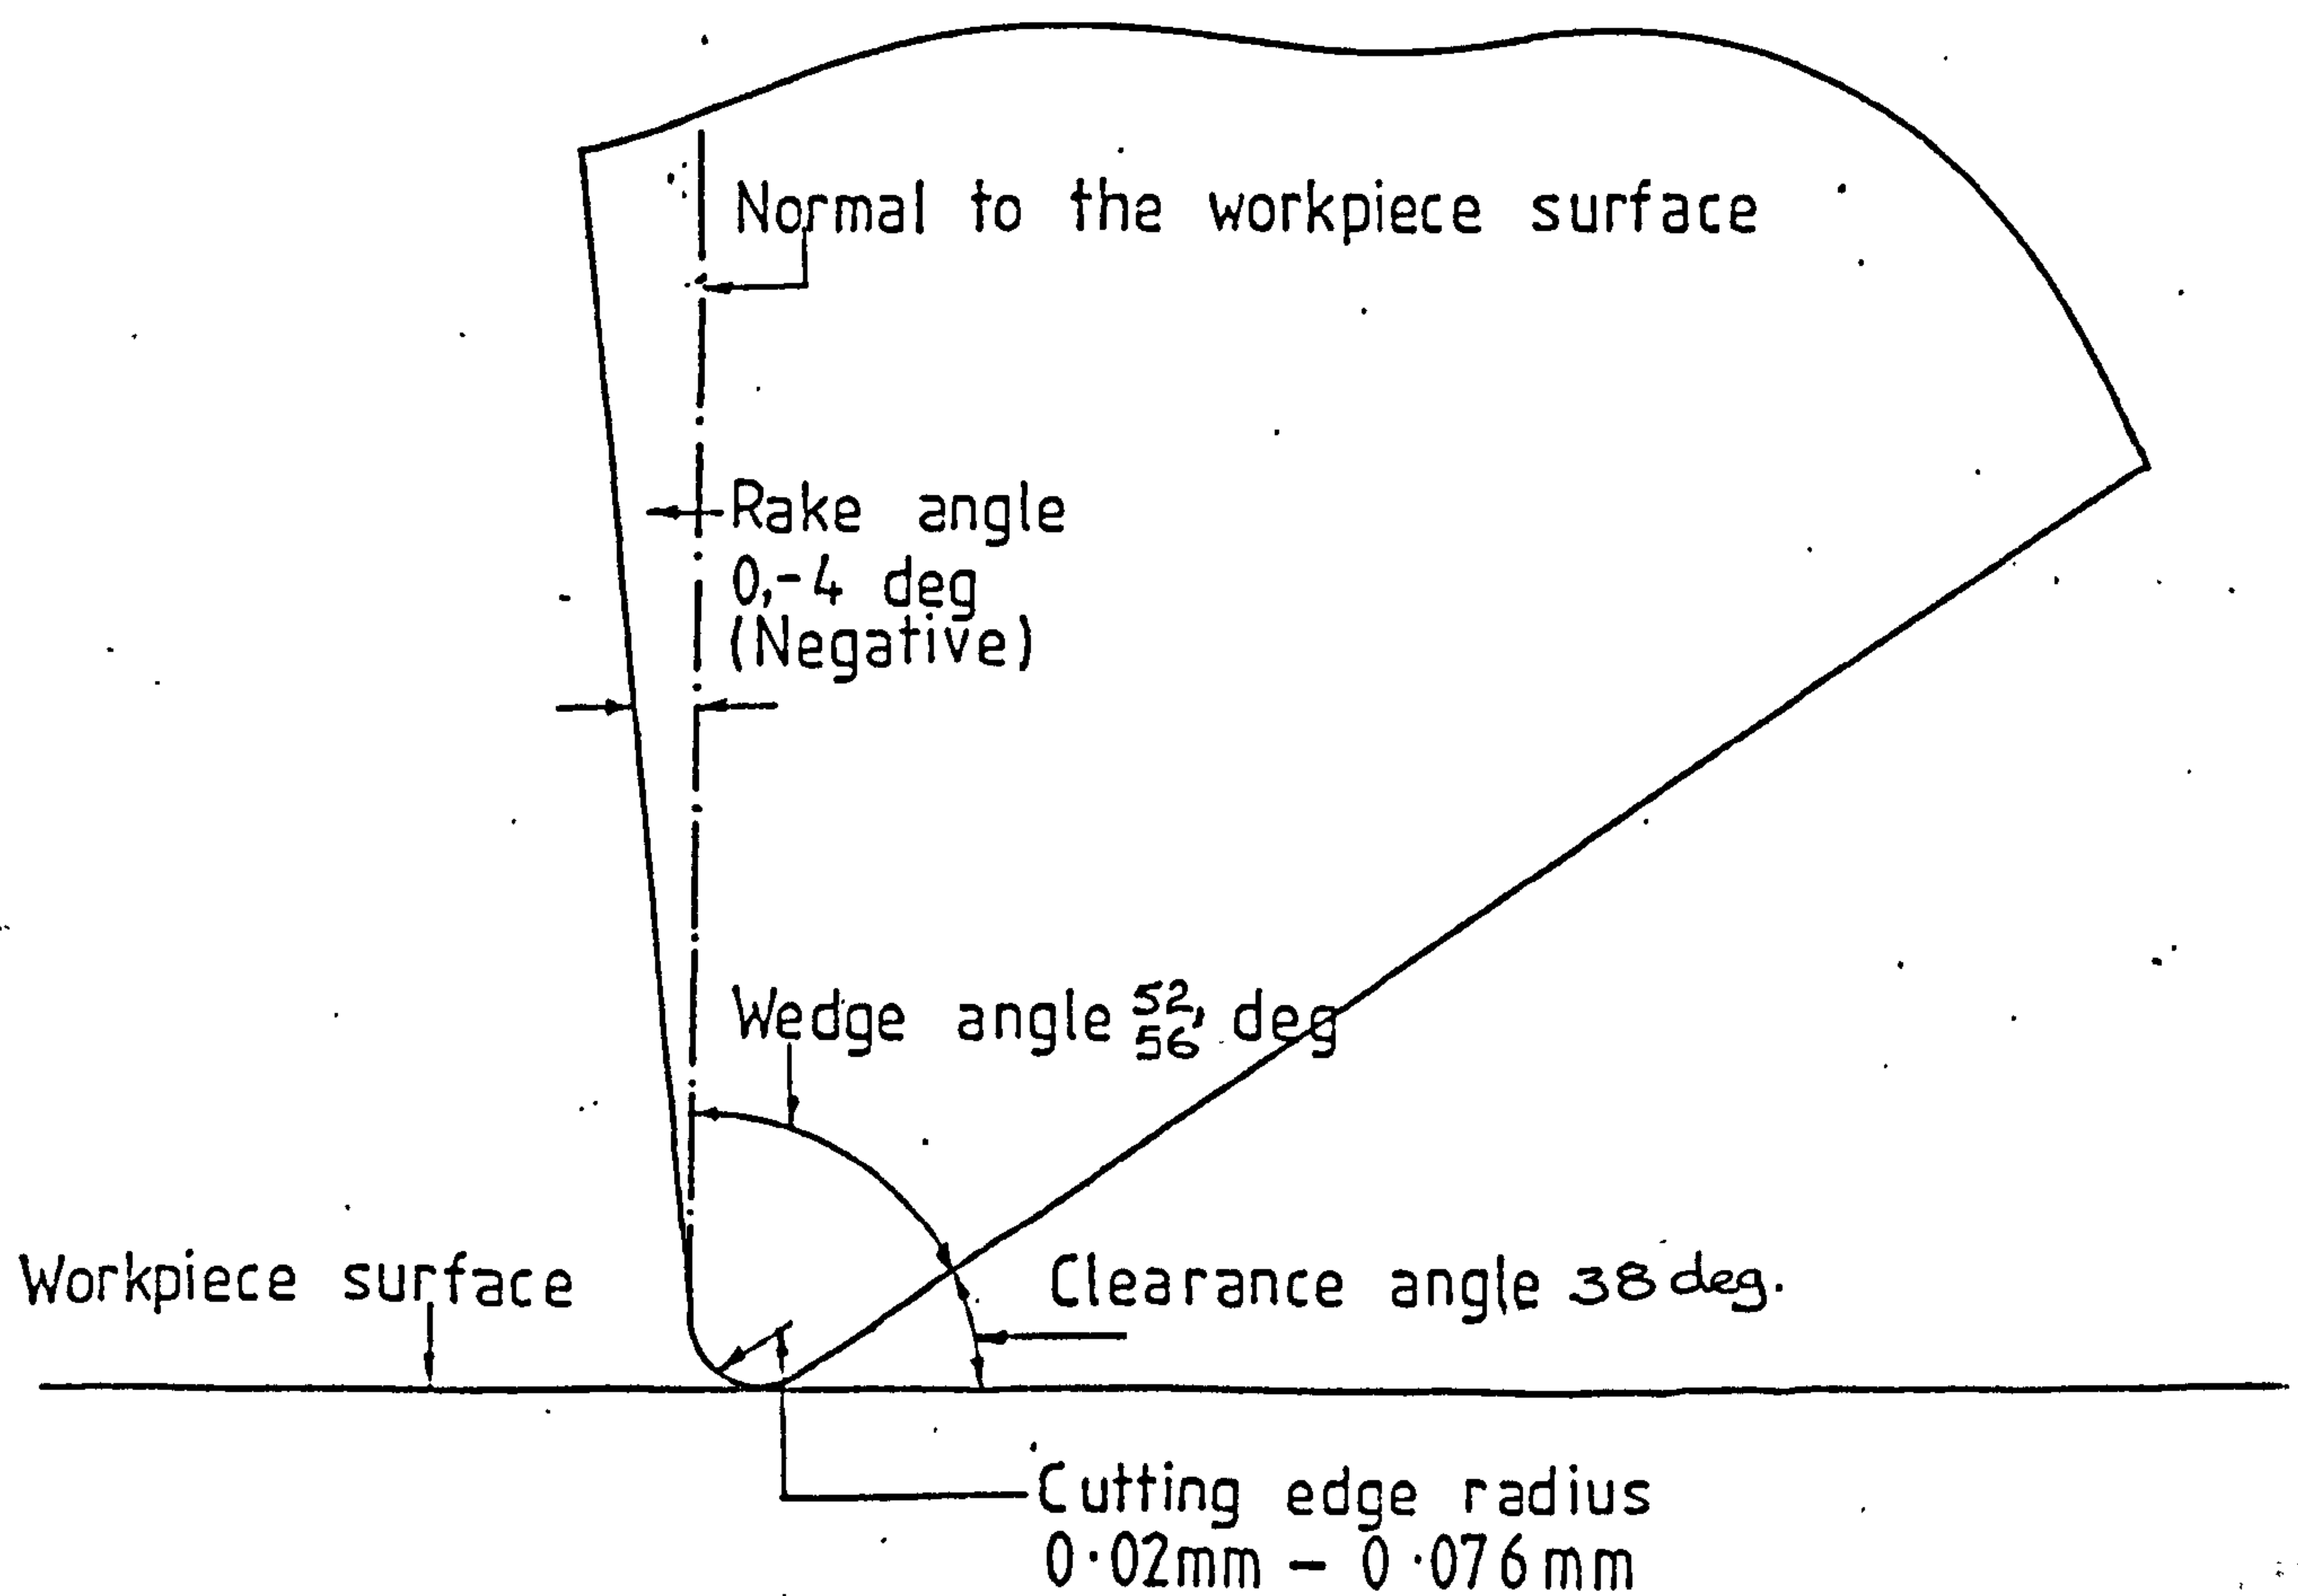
Cutting edge geometry of a hacksaw blade tooth
